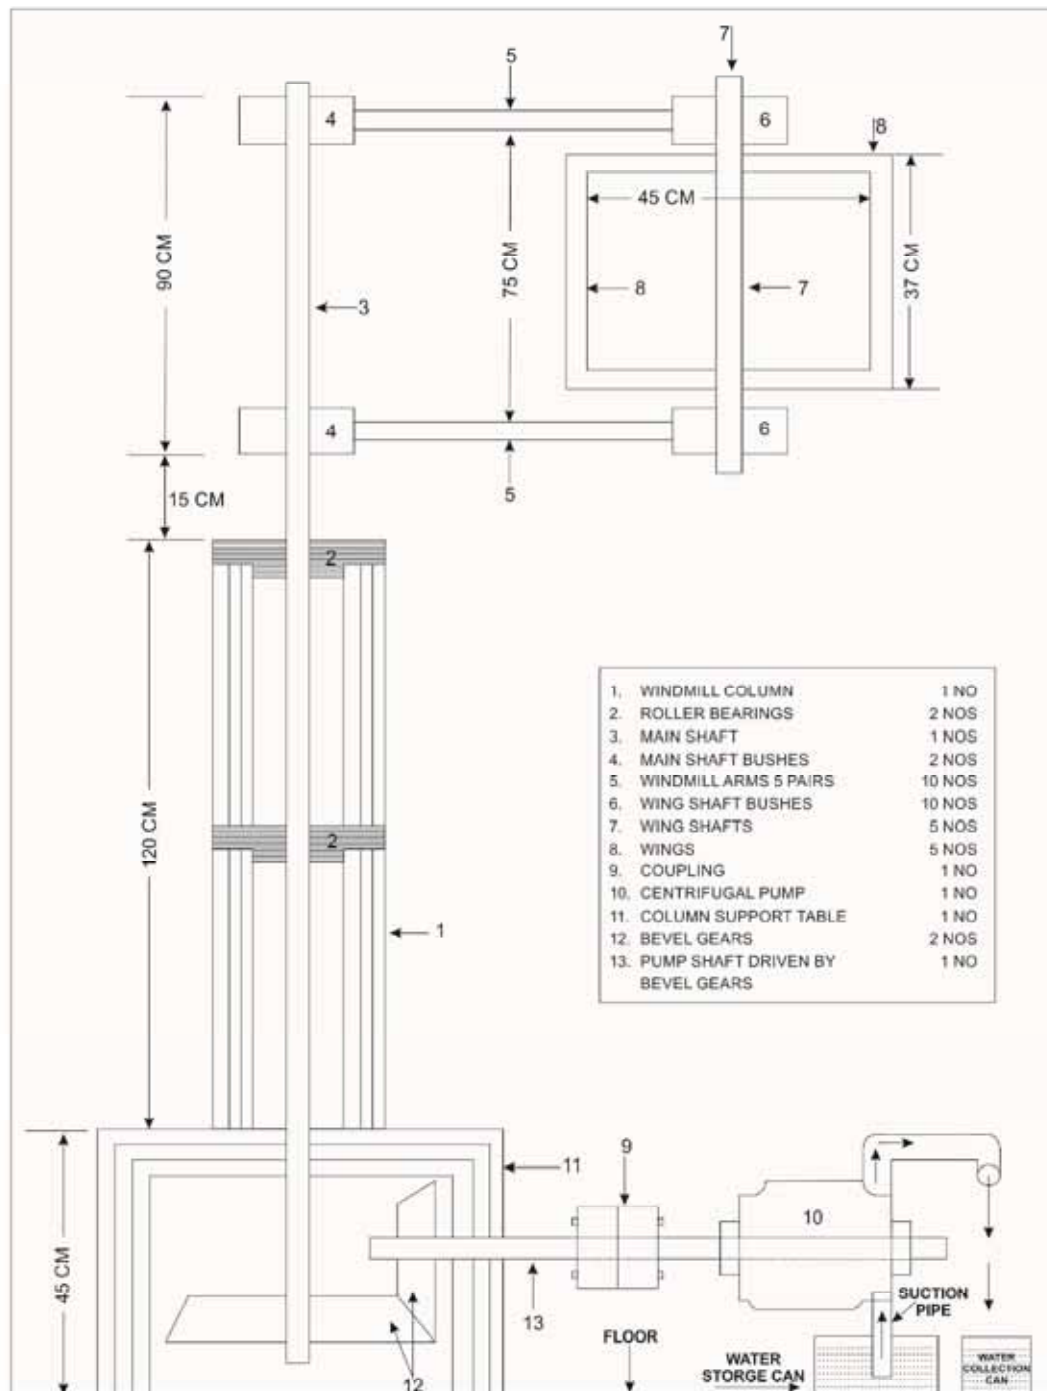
Windmill with bevel gear arrangement of torque transmission (Variant-I)
